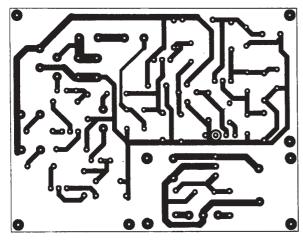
Actual-size, single-sided PCB layout for the circuit
